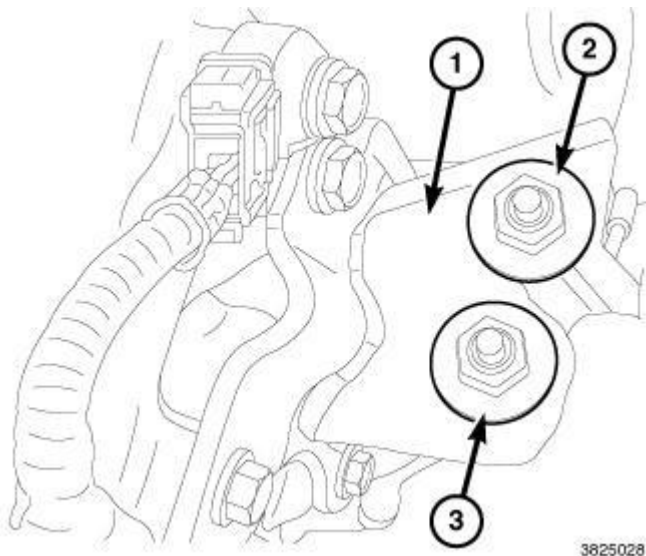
Upper Engine Bracket, Mount & Bolts - Right
